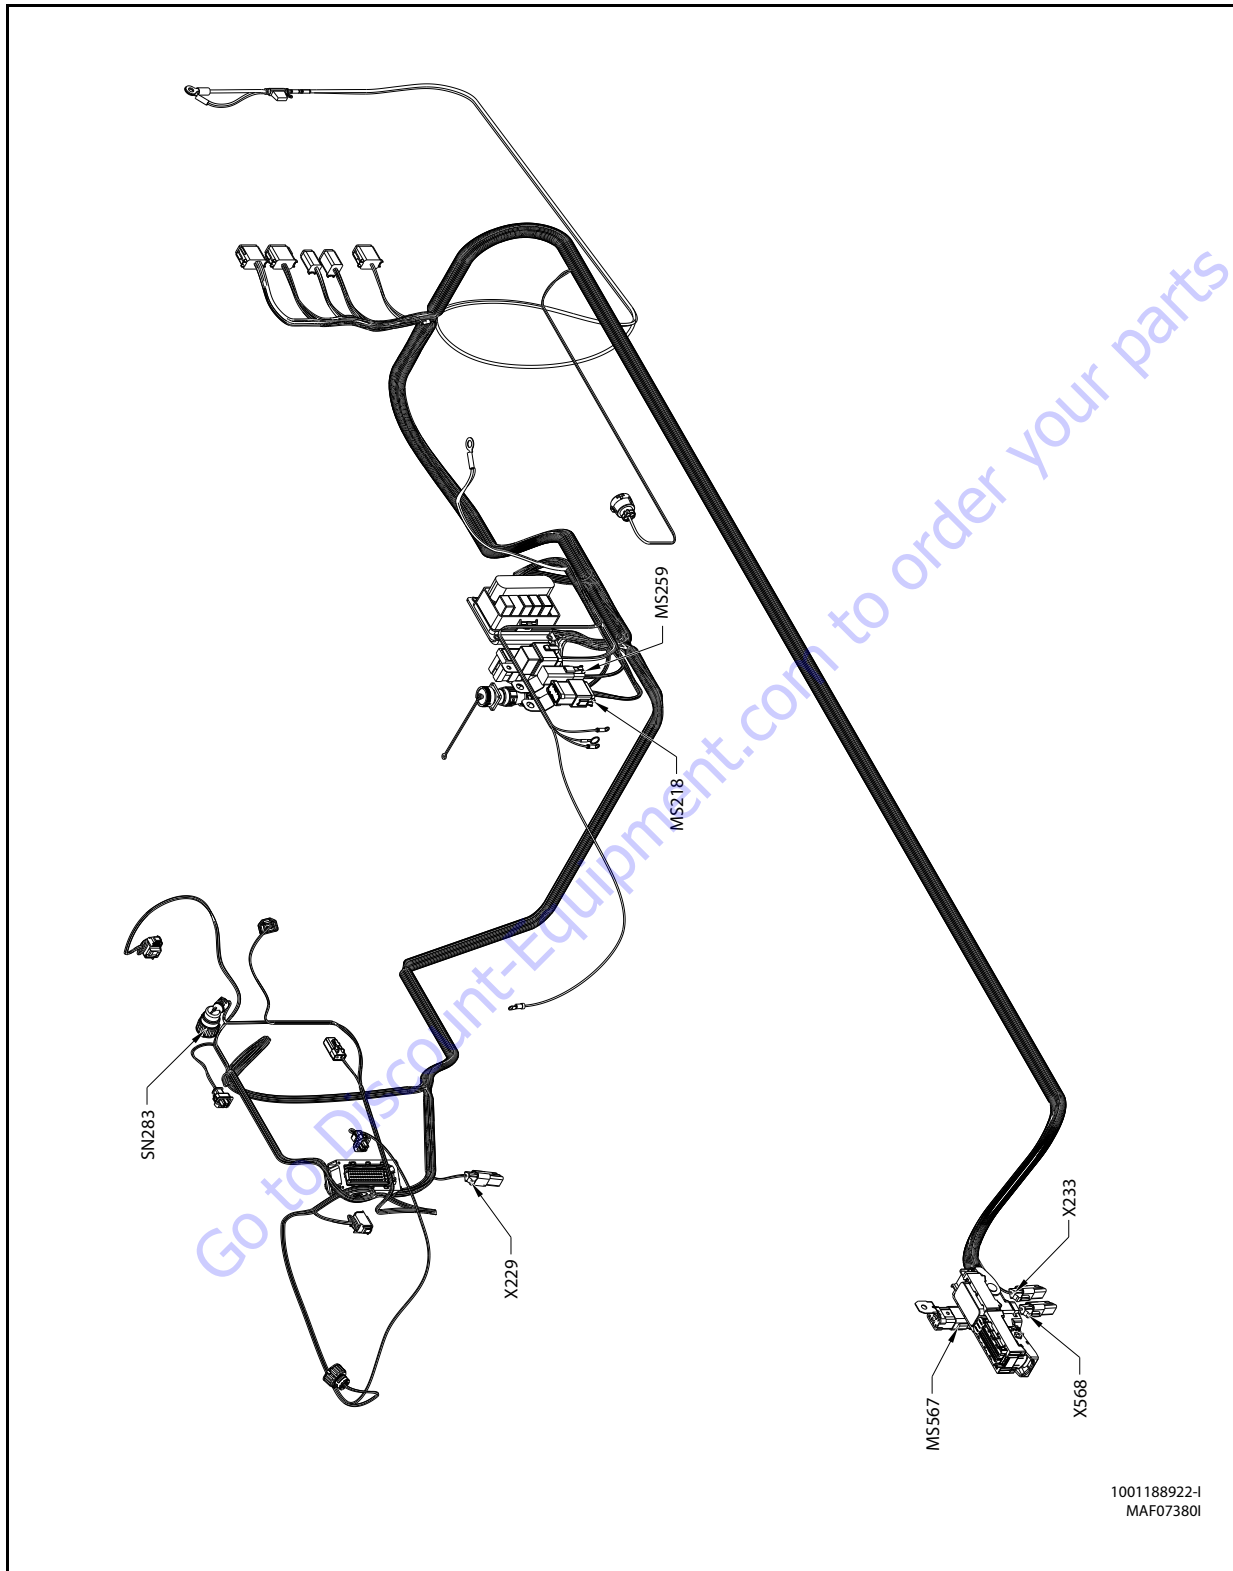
T4F Engine Harness - Sheet 7 of 7
